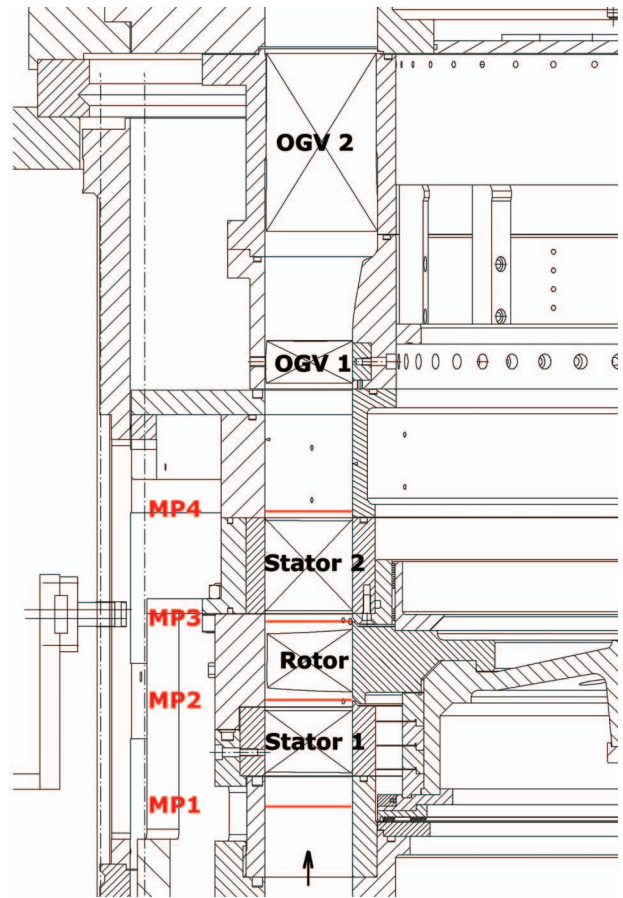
1.5-stage turbine section with probe measurement planes and tandem exit guide vane section
